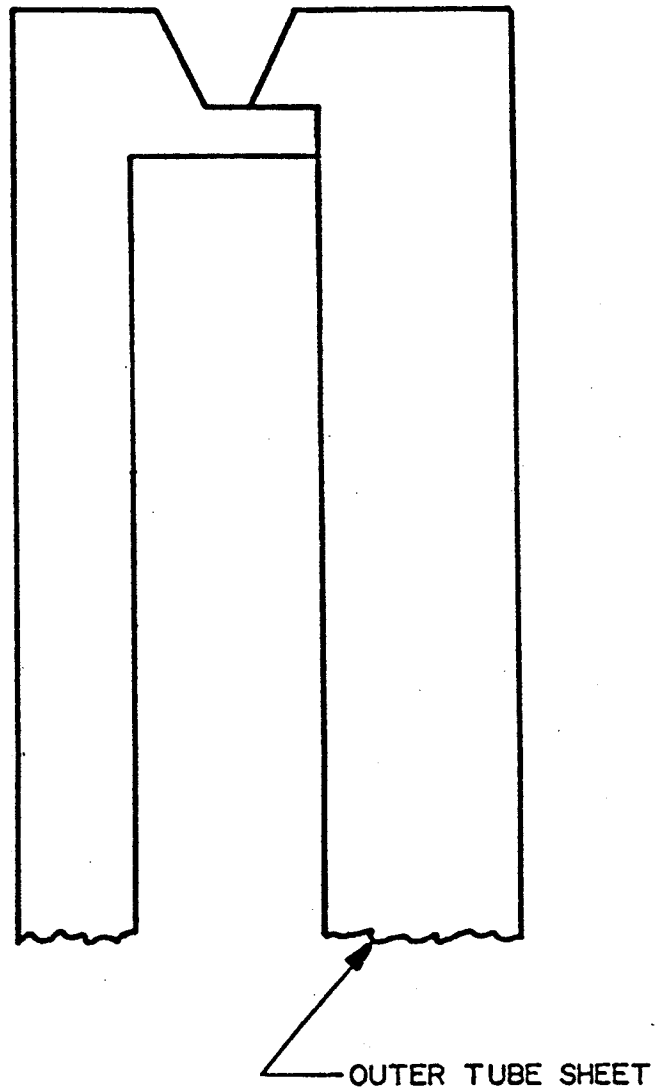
Acceptable method of welding inner and outer tube sheets - cooler applications for which cyclic life requirements are not specified.
